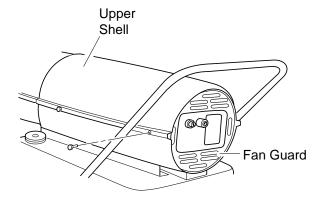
Upper Shell Removal, 44 kW (150,000 BTU/Hr) Model
